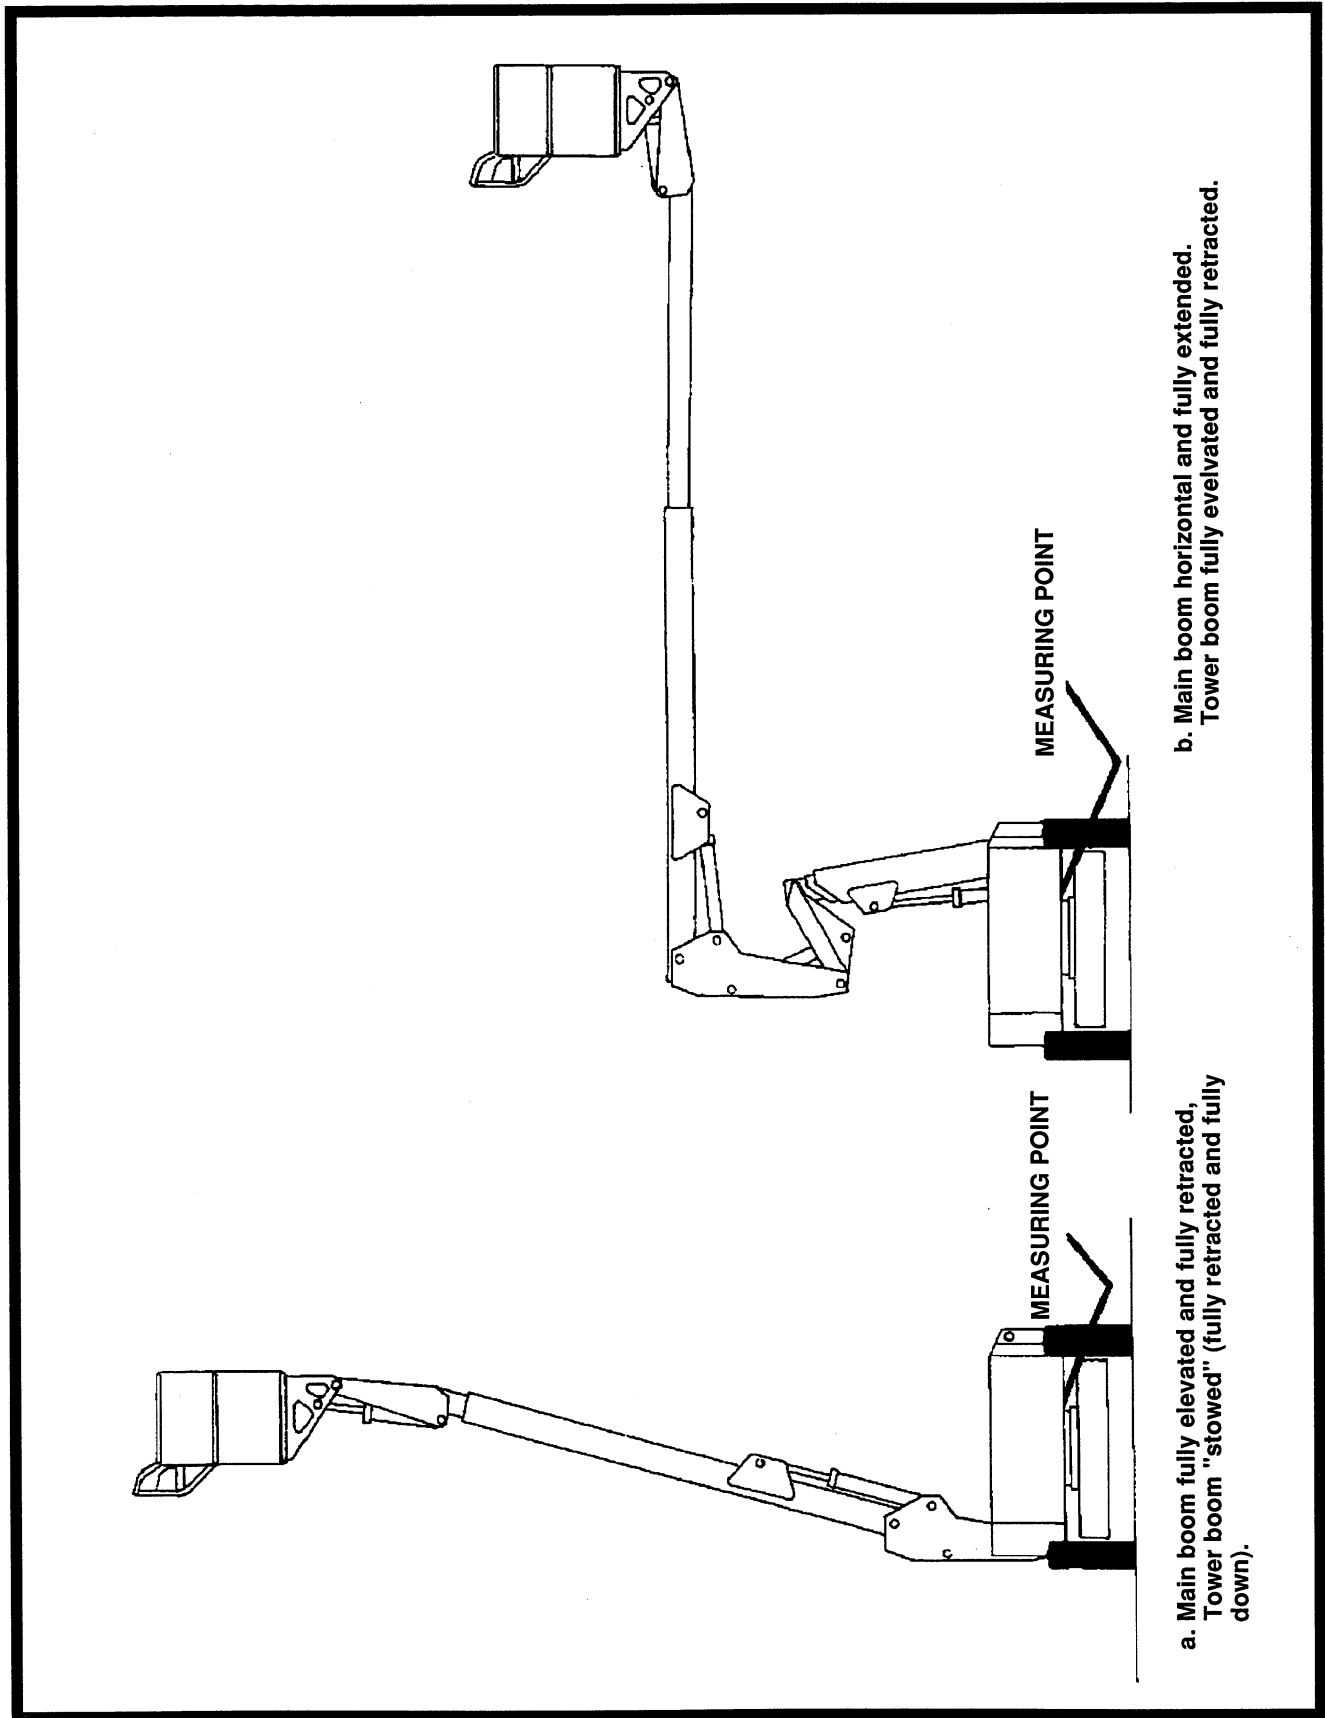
Swing Bearing Tolerance Boom Placement.
